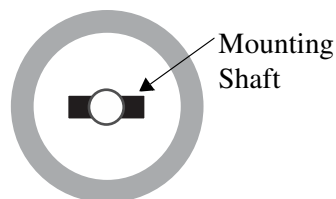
Rear View: Connect the Mount Shaft to the Actuator Shaft
